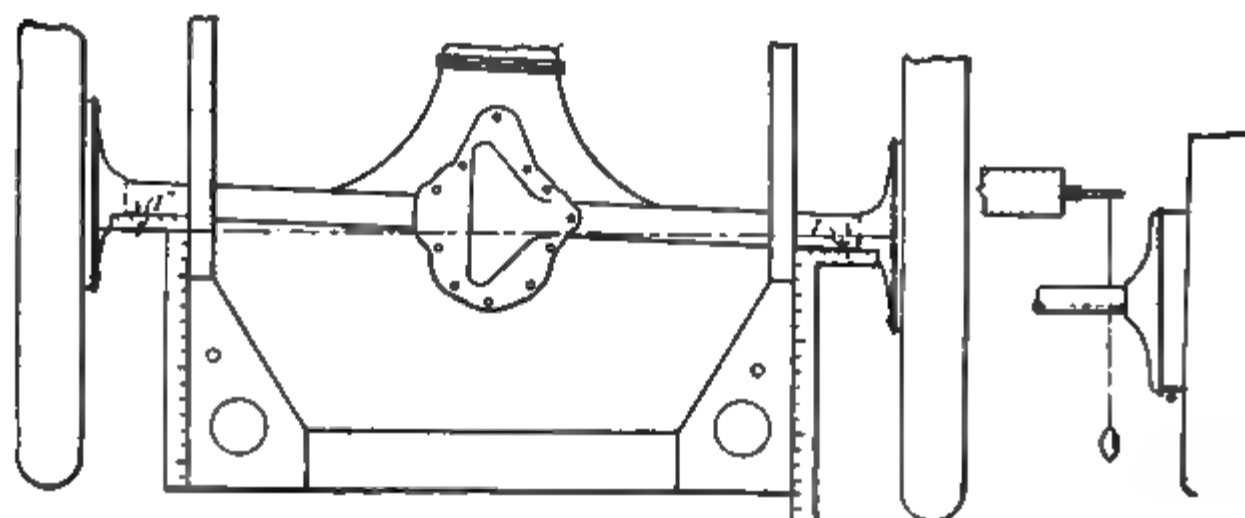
Method of Checking up Rear-Axle Alignment with Square and Plumb Bob
